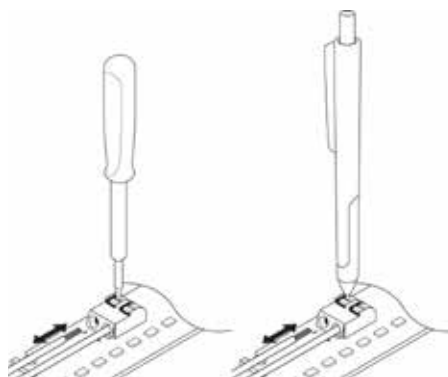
Insert/remove the stranded conductor by lightly pushing on push button, e.g., using a tool or a ball point pen.
